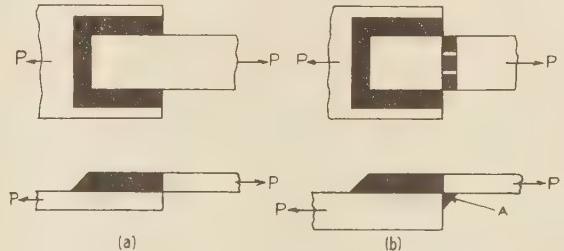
FILLET-WELDED JOINTS CONTAINING BOTH TRANSVERSE AND PARALLEL WELDS
